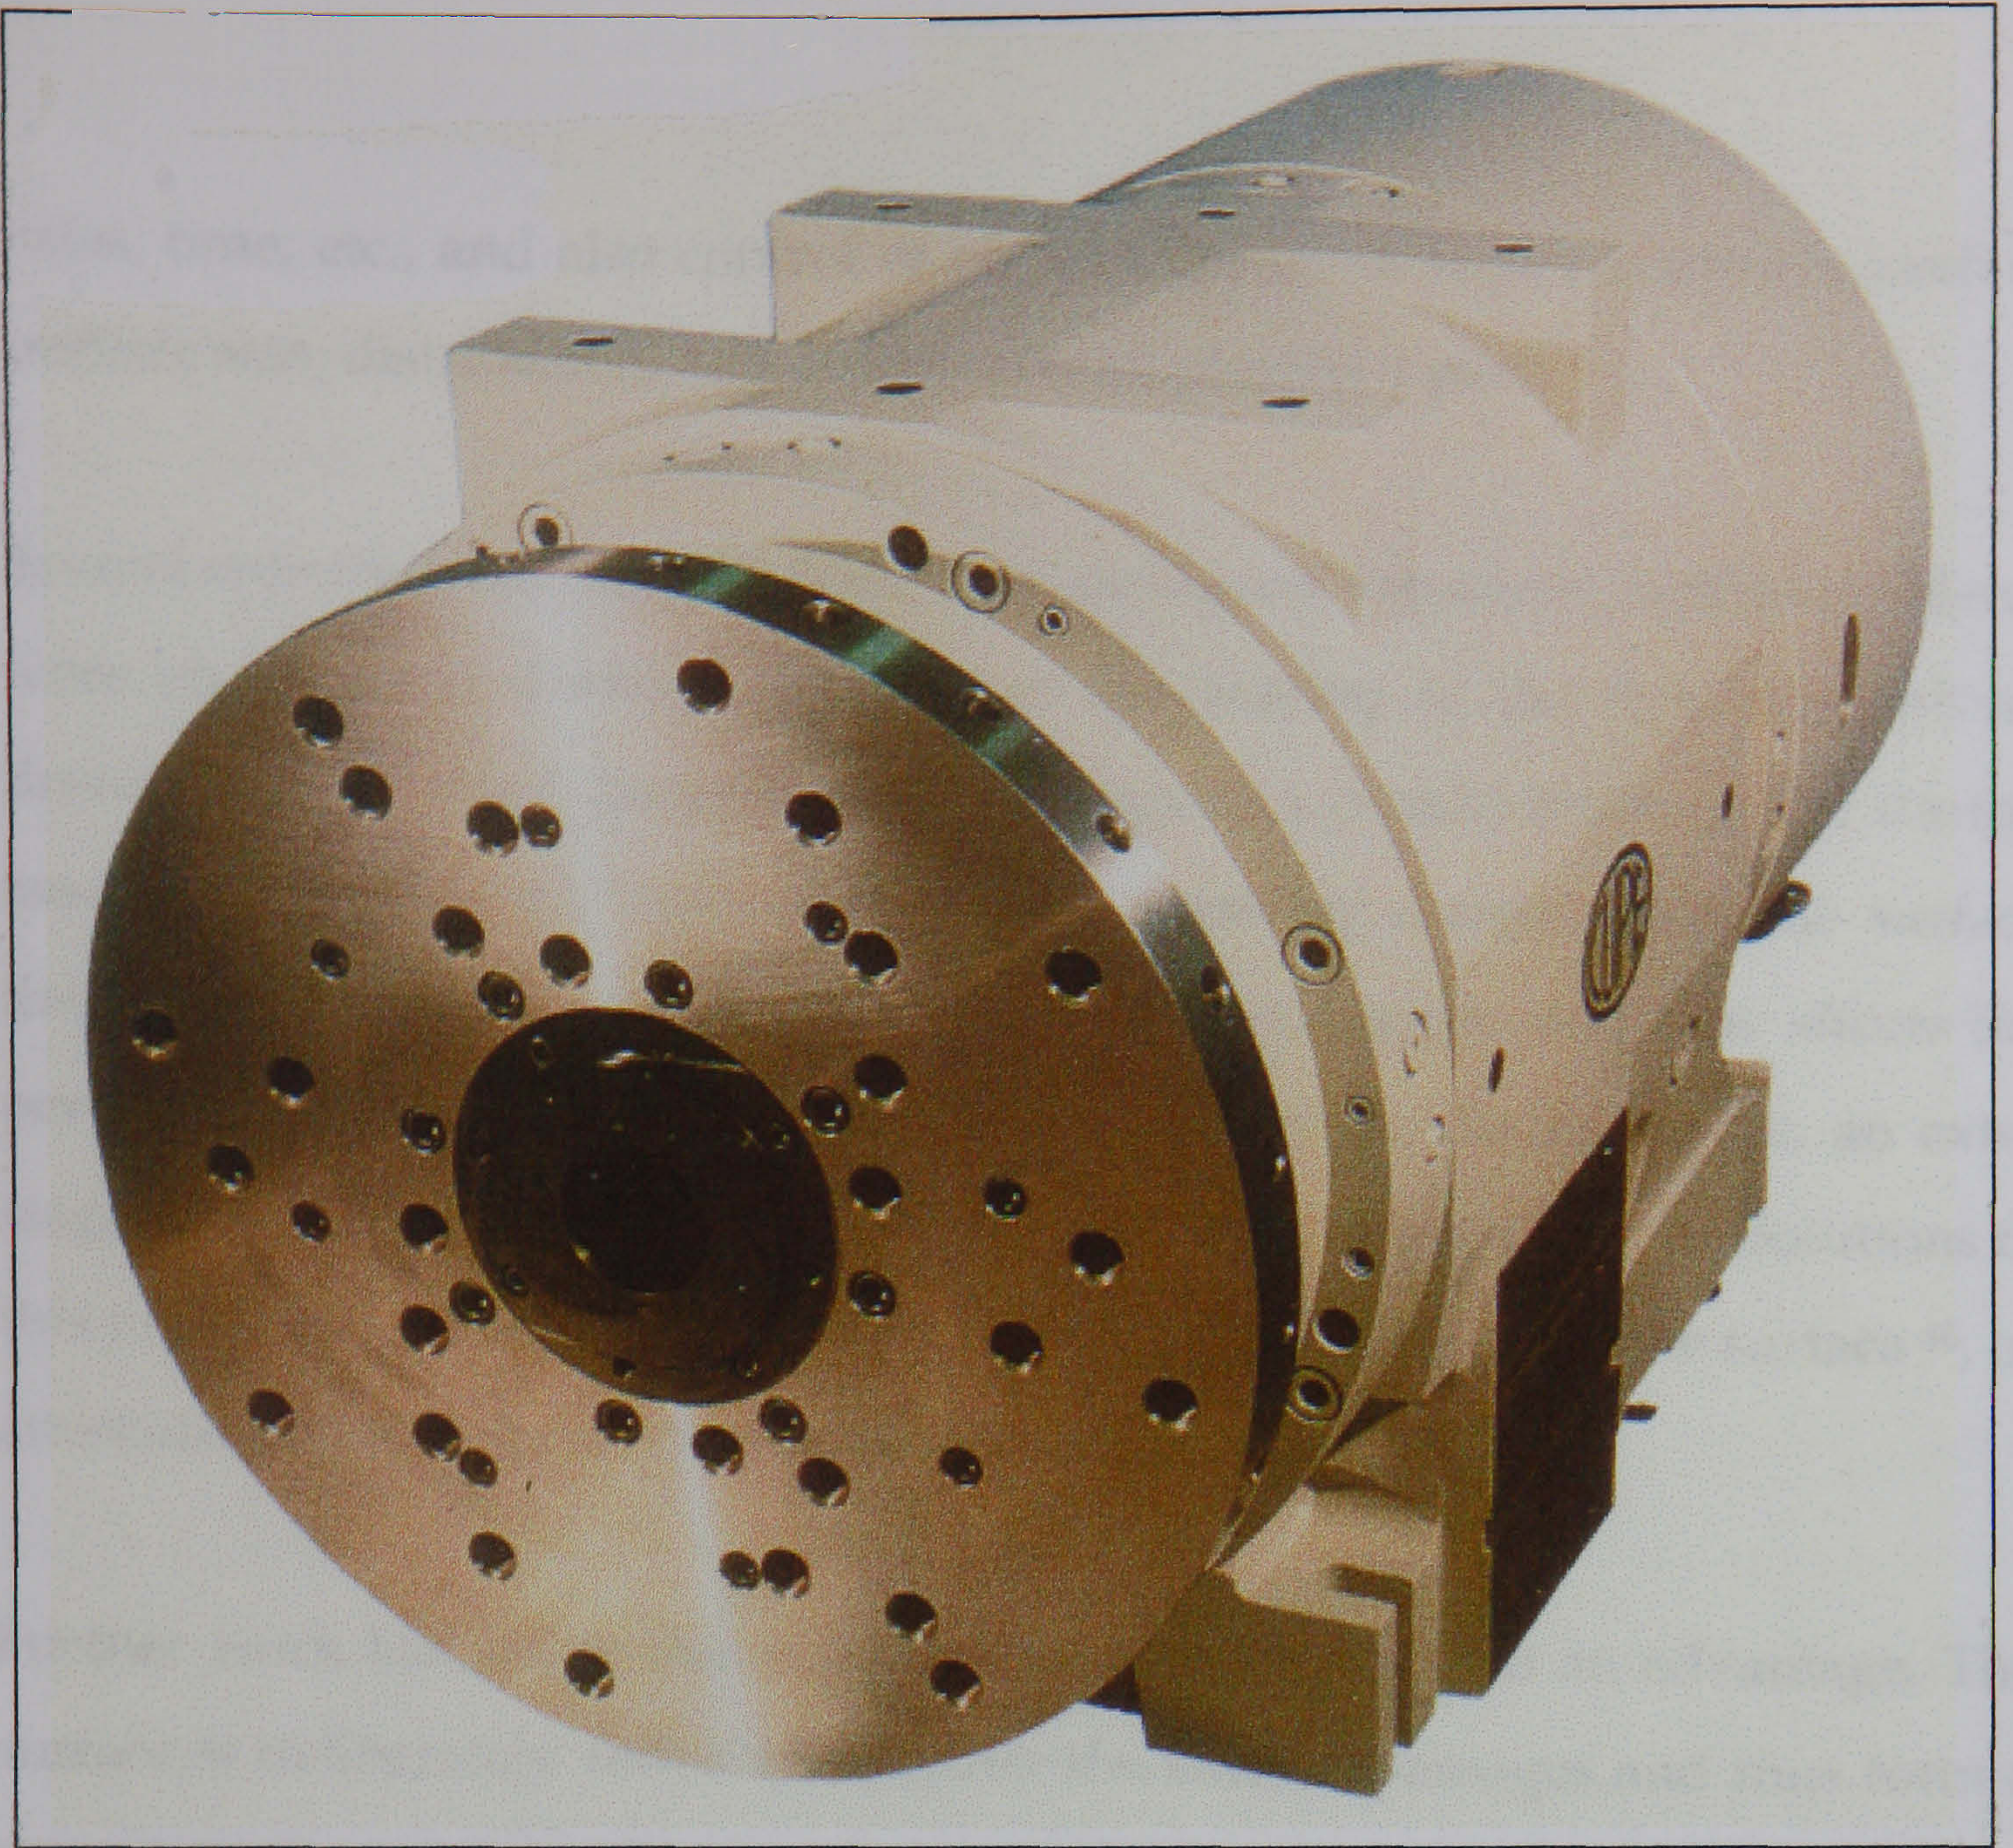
Example of a spindle using porous graphite bearings (from ⁴²)
